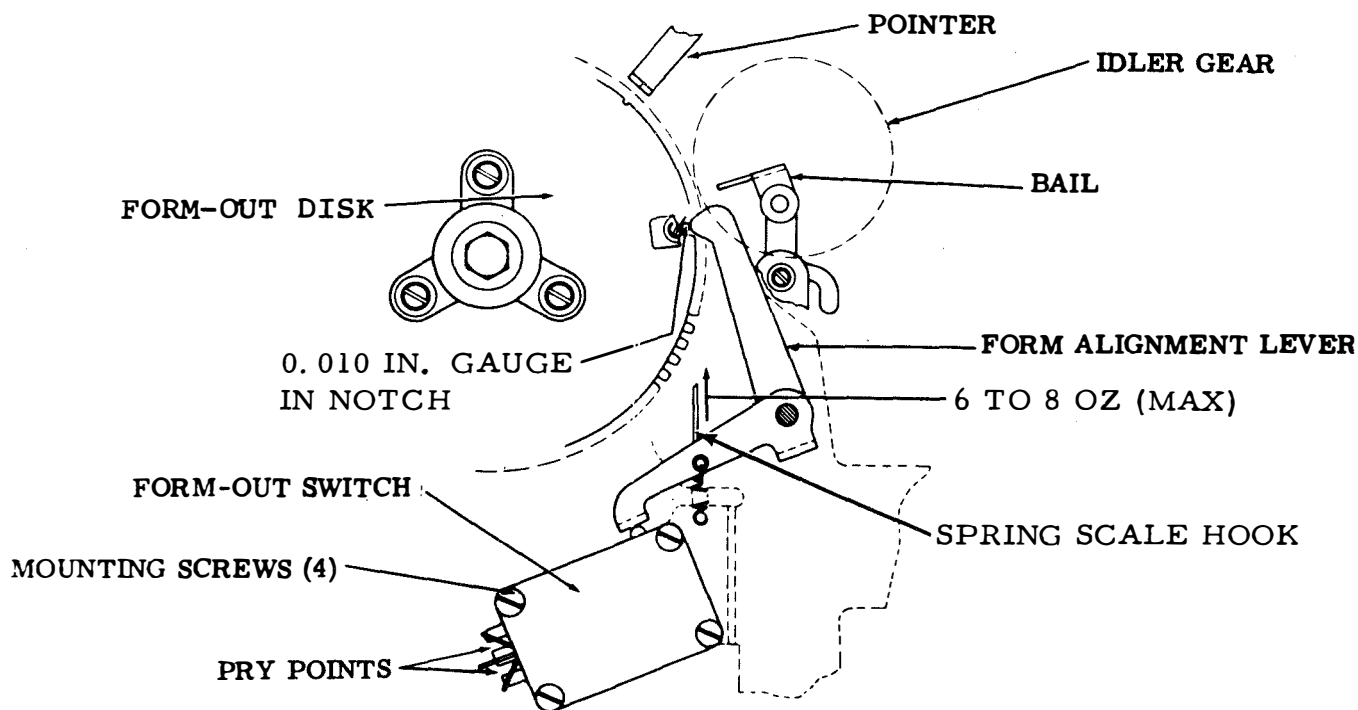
Form Alignment Switch and Form Alignment Switch Spring, Left Side View
